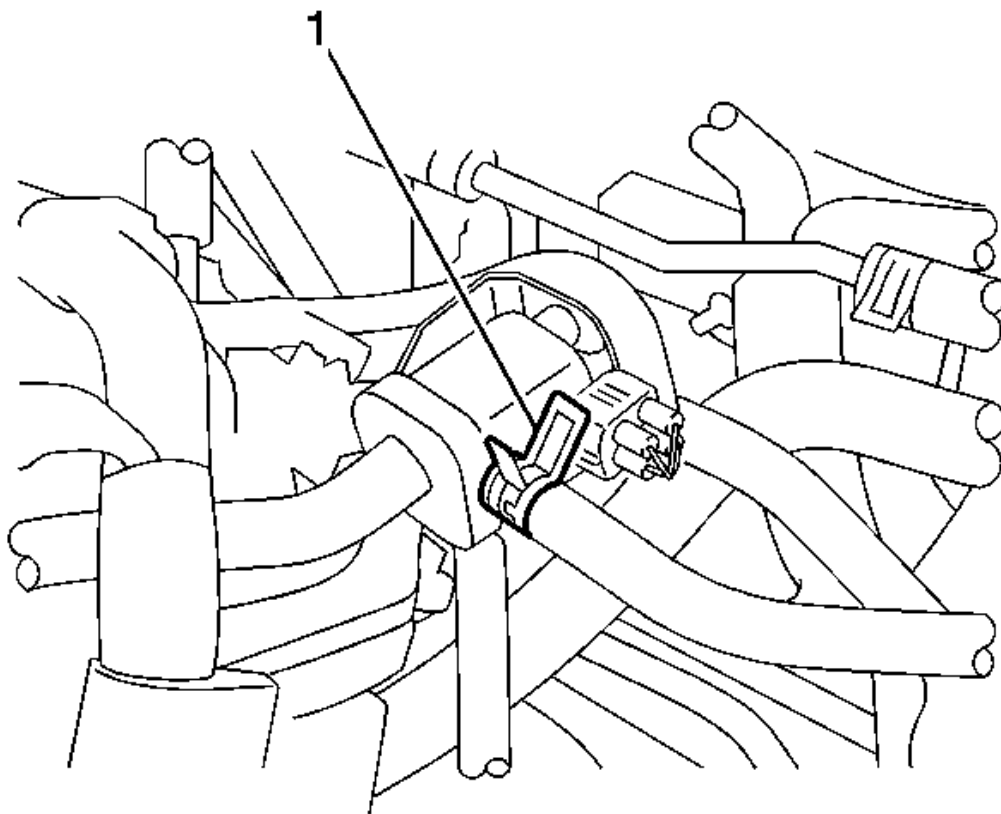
Identifying Fuel Vapor Feed Hose Assembly
